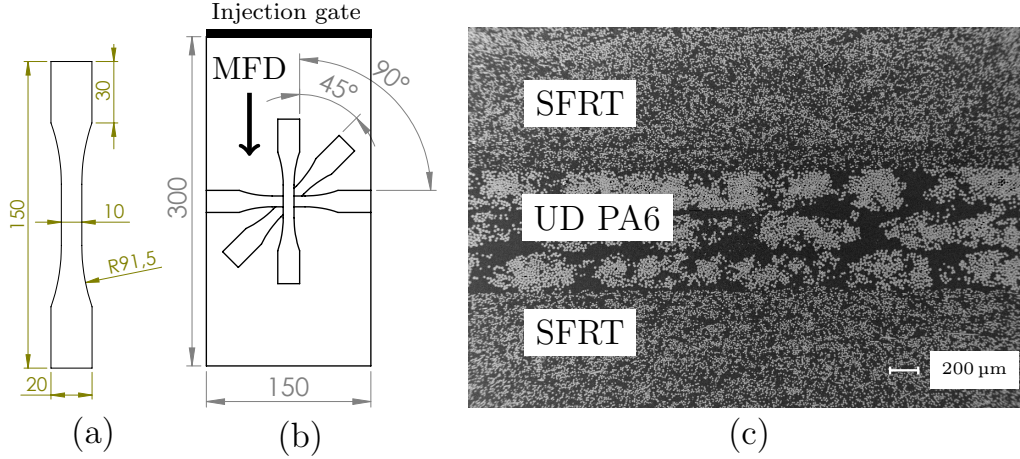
(a) Specimen dimensions (mm). (b) Mould plate dimension (mm) and cutting sample orientations. (c) *Hybrid material*: UD plies overmoulded by SFRT (SEM).
